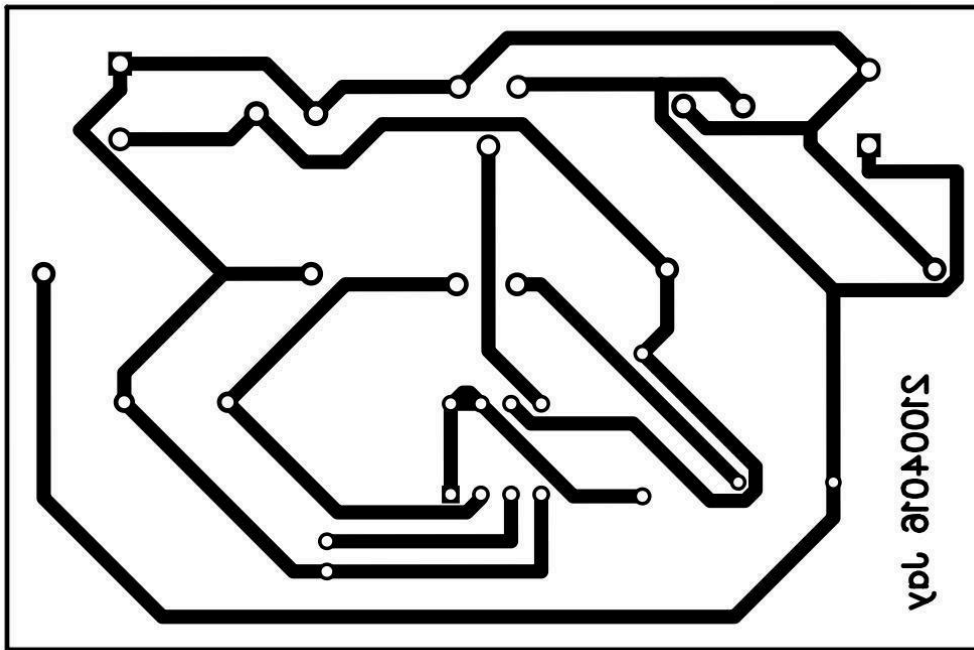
Layout to be printed on Copper Clad PCB Board
